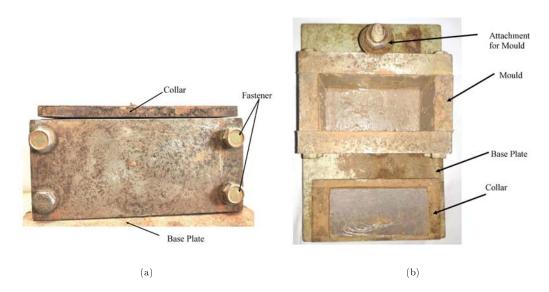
Fabricated brick mould along with assembly (a) front and(b) top view
